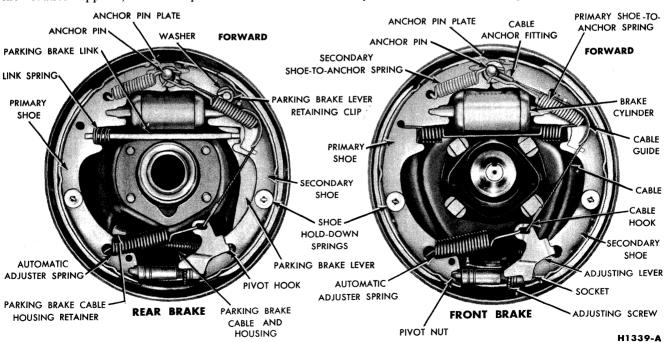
Self Adjusting Brake Assemblies - F-100 Series
